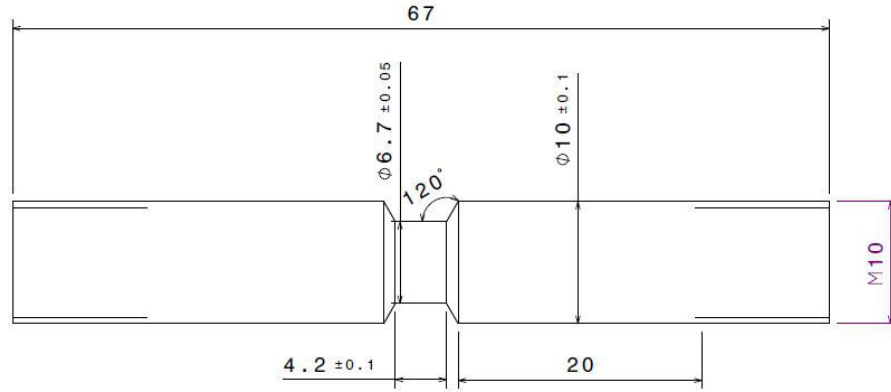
Hot cracking test specimen; schematic drawing.
